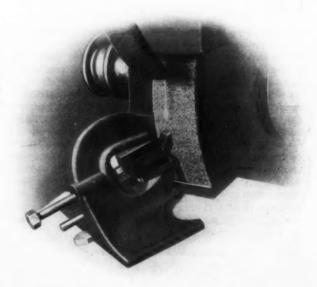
Holder for Grinding the Ends of the Teeth.
